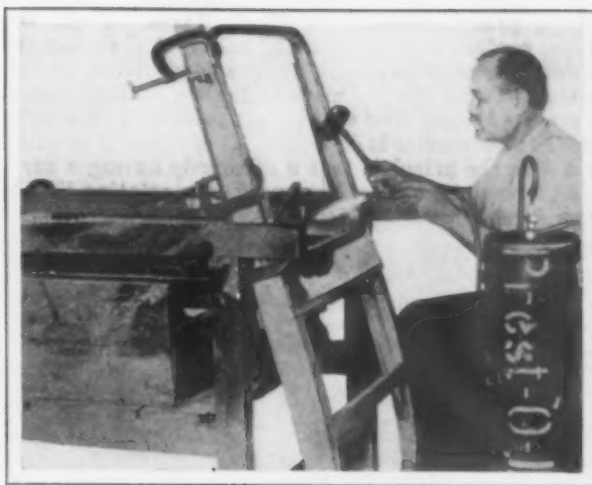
Annealing Aluminum Window Frame Opening with Acetylene Blow Torch to Facilitate Hammering over Frame Without Cracking
